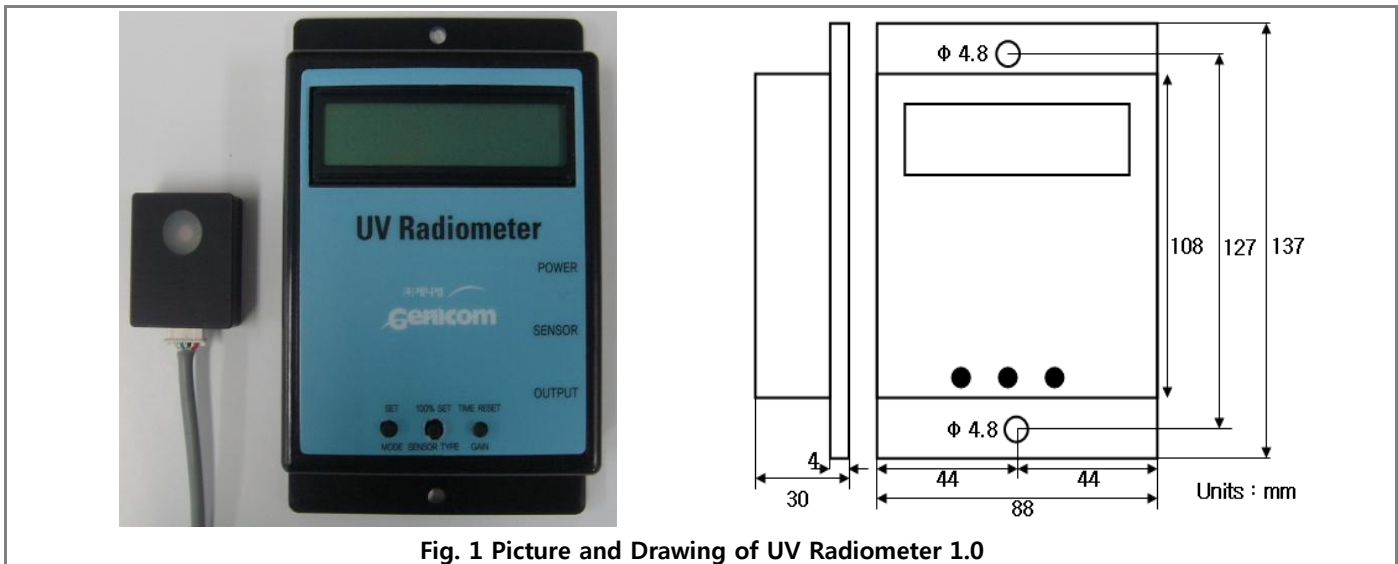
Picture and Drawing of UV Radiometer 1.0
